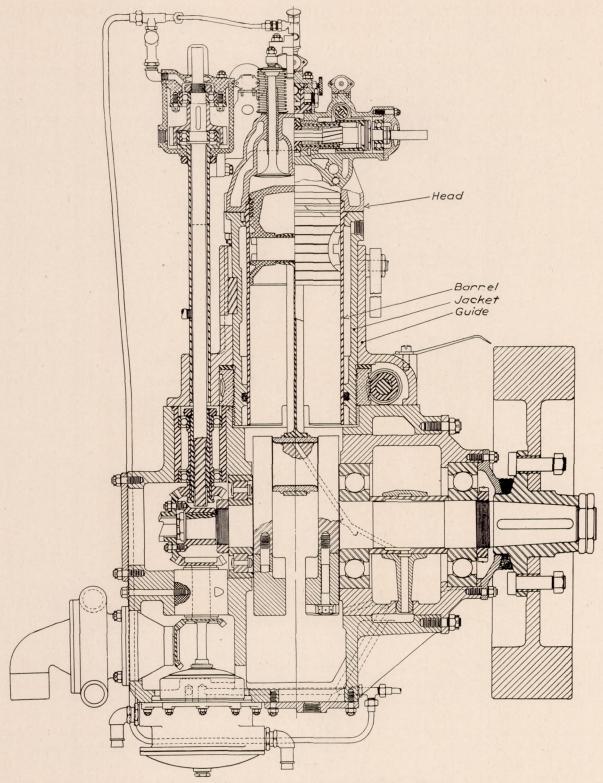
N. A. C. A. universal test engine—longitudinal cross section
